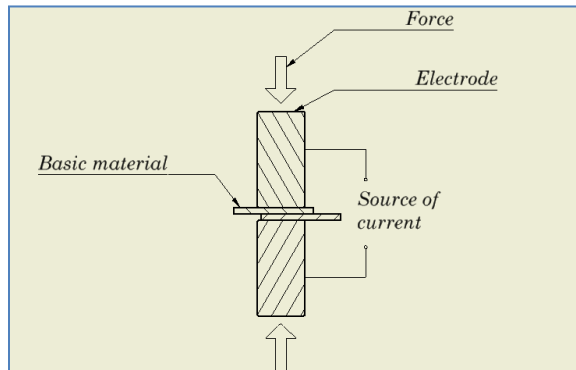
Cheme of Electric resistance welding process[4].
